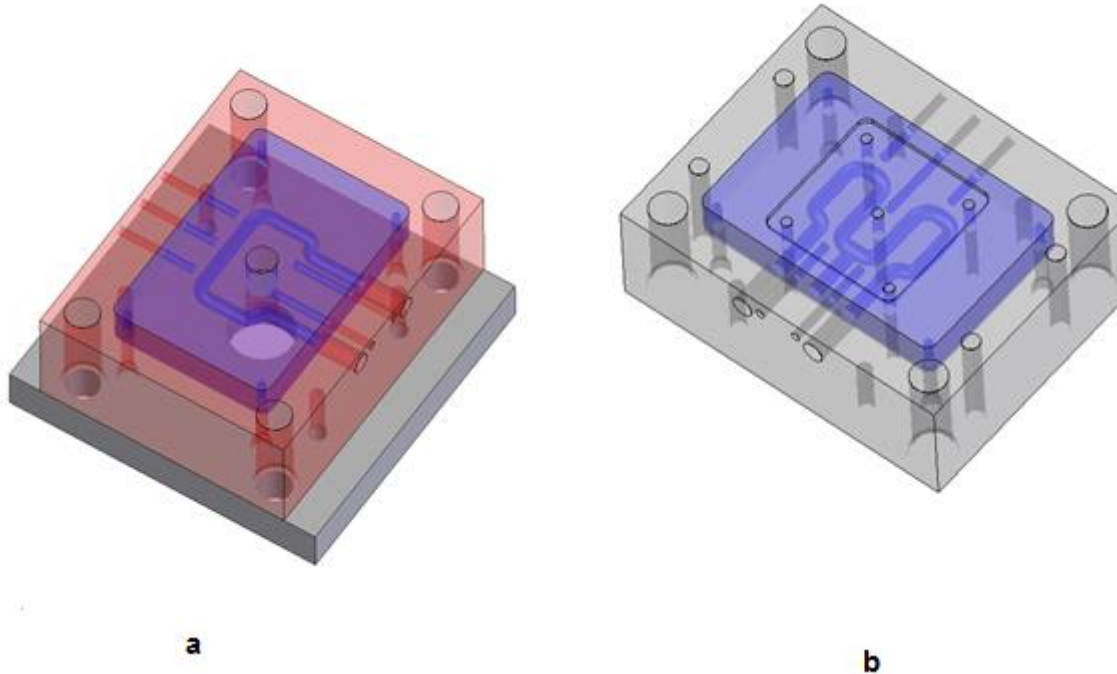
CAD of a fixed (a) and moving (b) mould half
